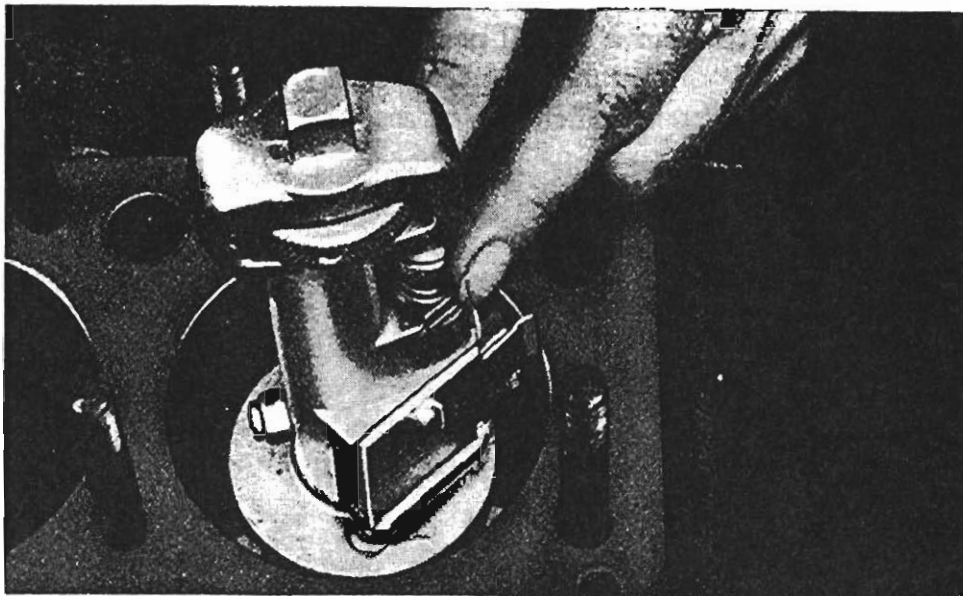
Turning the Small Knurled Knob Clockwise Advances the Cutting Blade.
